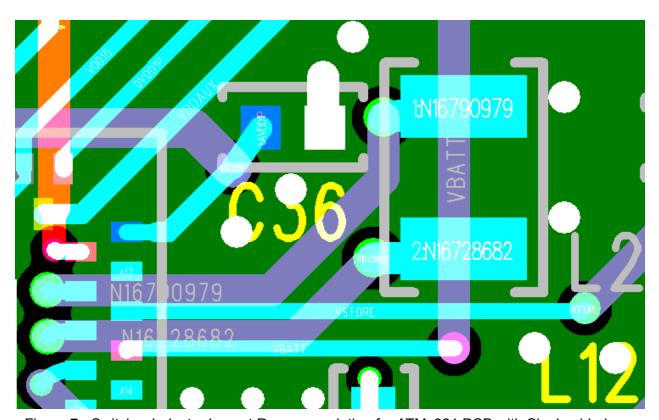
Switcher Inductor Layout Recommendation for ATMx221 PCB with Single-sided SMD Components
